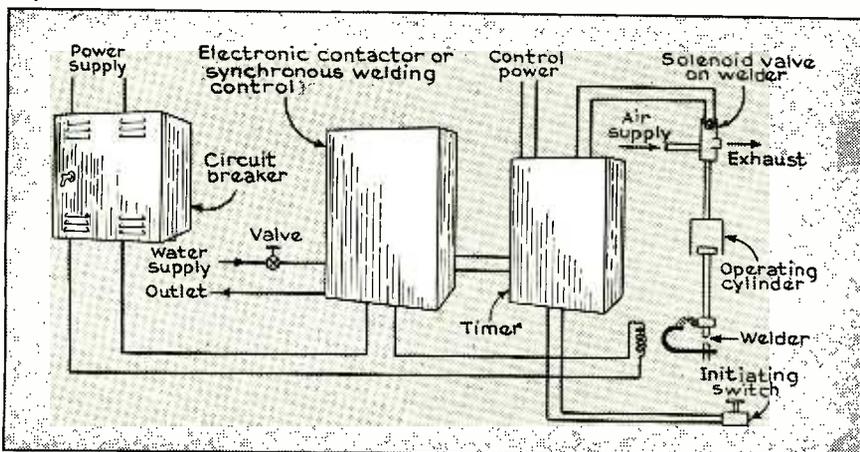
Complete setup for resistance welding, illustrating a typical arrangement of electrical and mechanical as well as electronic controls
